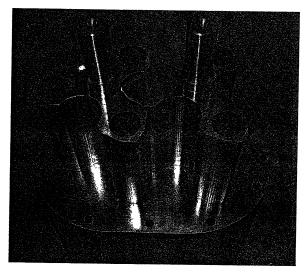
Rotors Assembled on Drive End Plate (Model 4000 with tri-lobe rotors shown)
